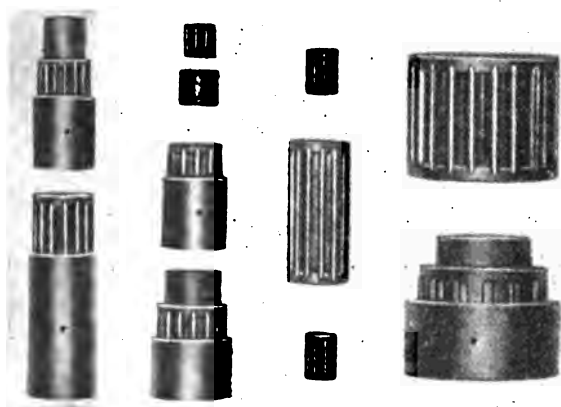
SEC. 7c.—Solid roller journal bearing.
